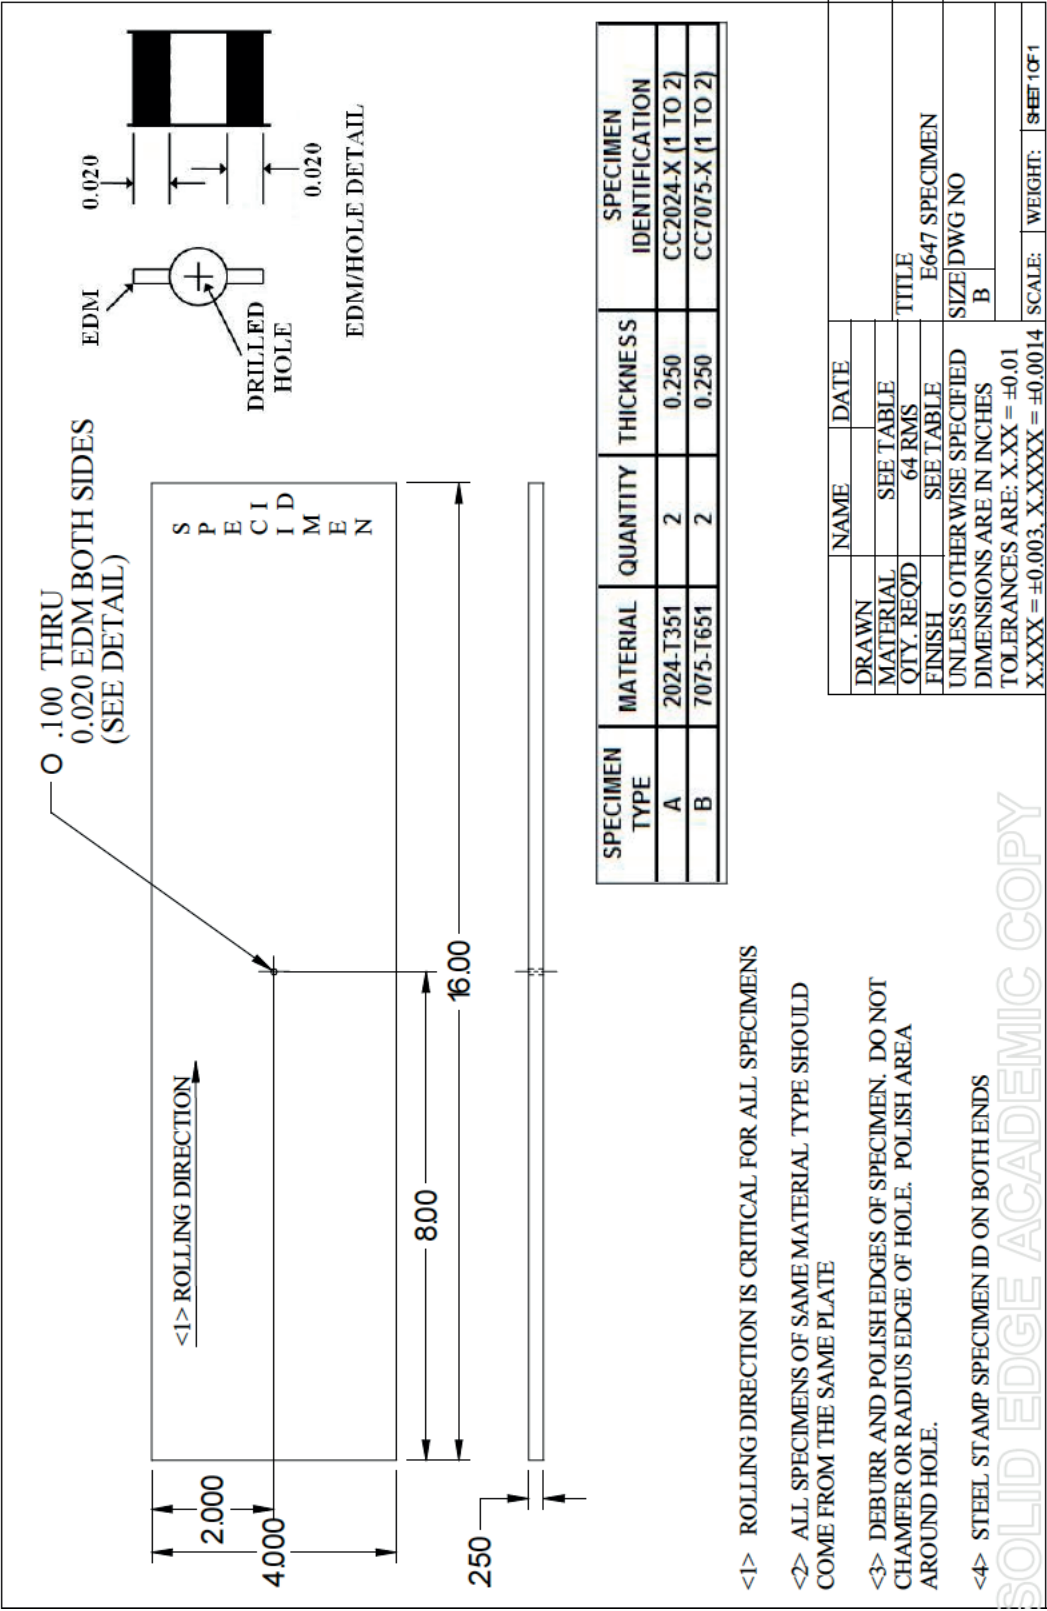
Manufacturing Drawing for ASTM Standard E647 Fatigue Testing Coupons.
